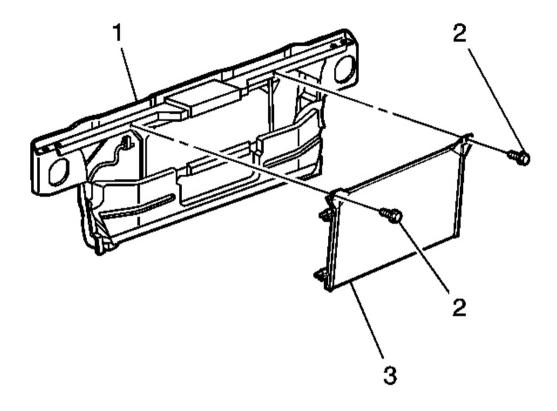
Condenser & Mounting Bolts Courtesy of GENERAL MOTORS CORP.
